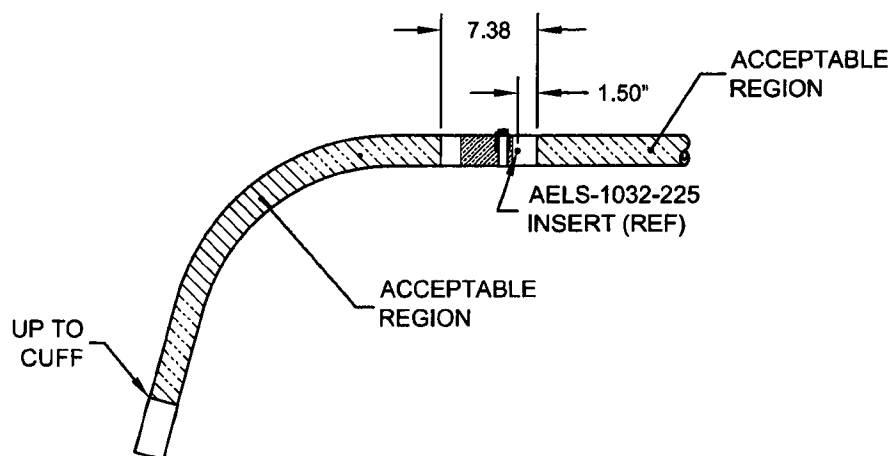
ACCEPTABLE REGIONS TO BE COATED WITH ARMOR SHIELD
